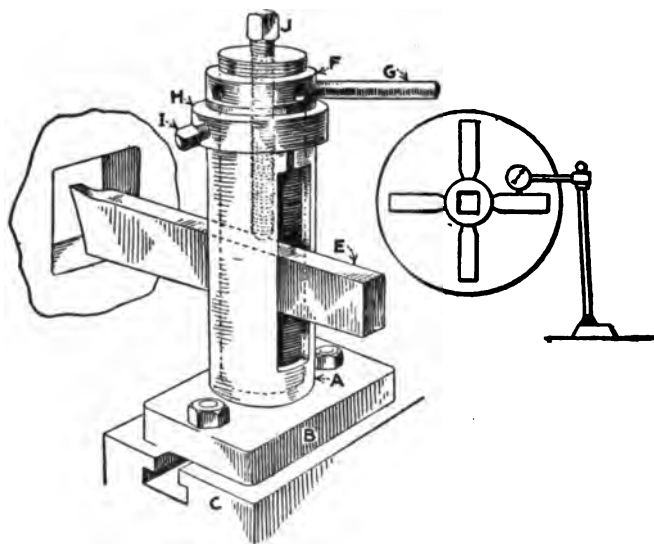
TOOLPOST FOR BROACHING HOLES IN THE LATHE
